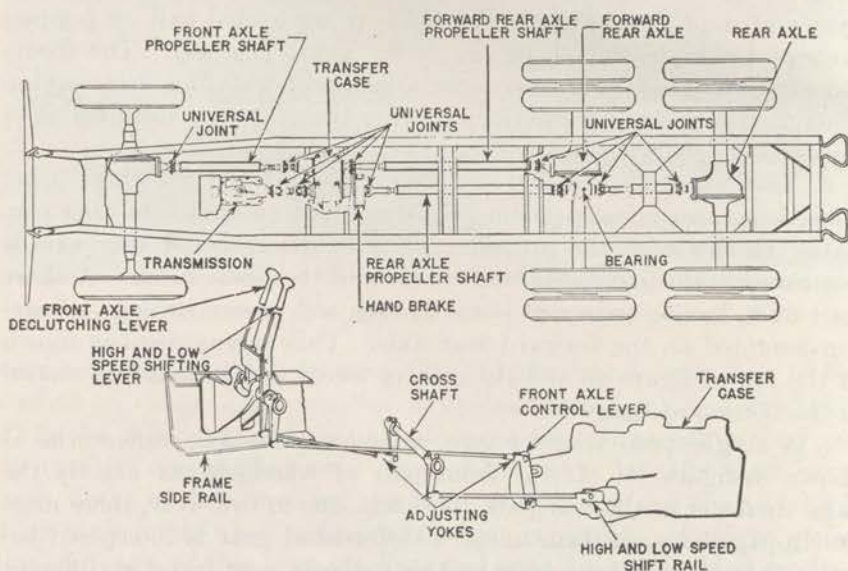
Transfer case connected to front driving axle and dual rear axles.
